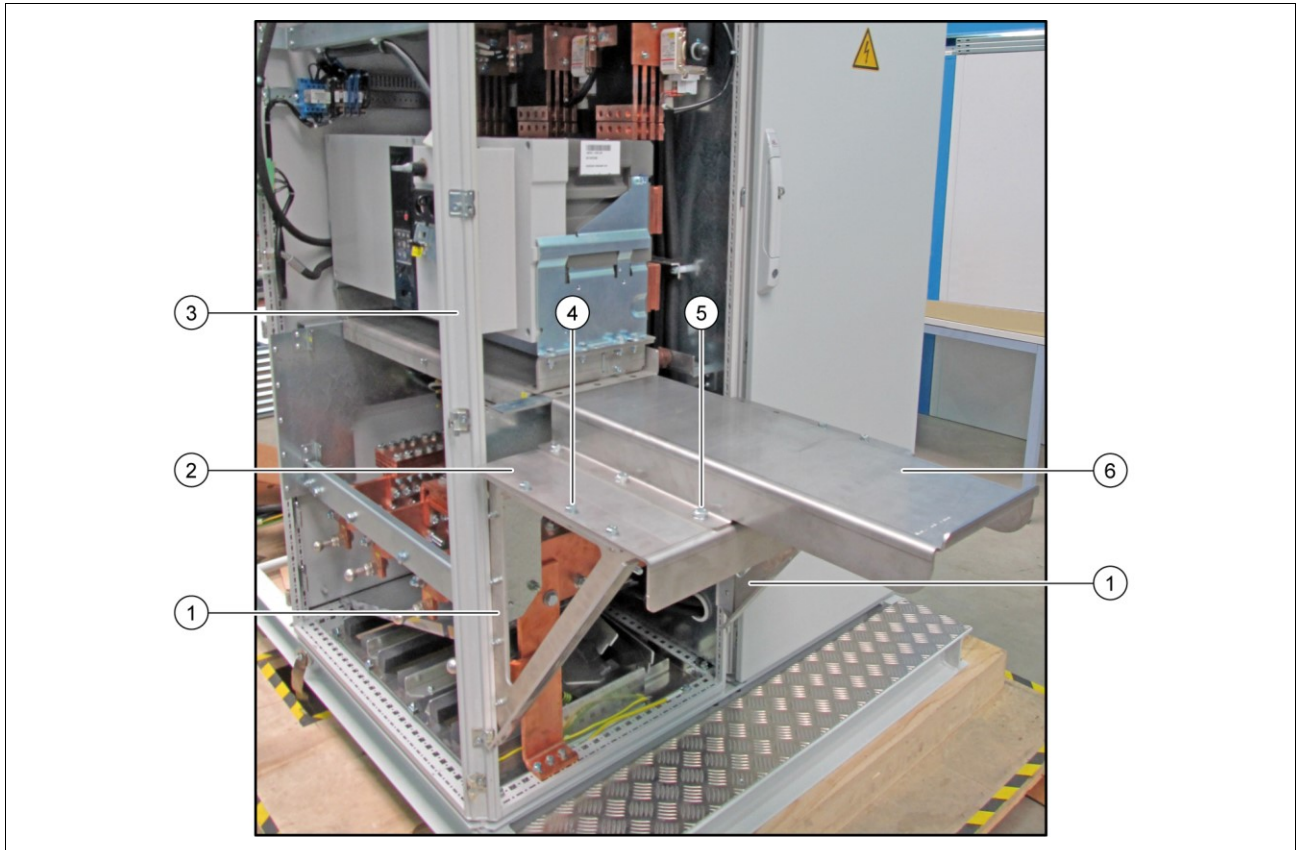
Supports and console with sliding panel (Exemplary illustration)
